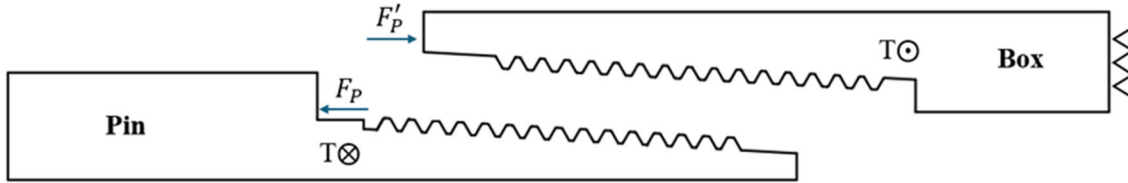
Analysis of torque forces on double shoulder drilling tool joints
